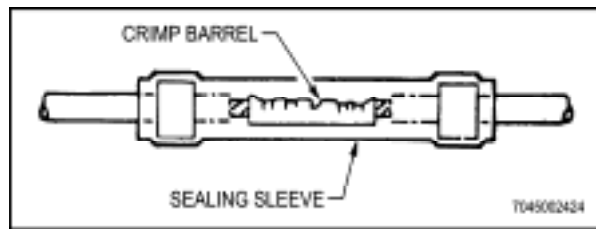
Sealing Sleeve Centred Over Crimp Barrel
